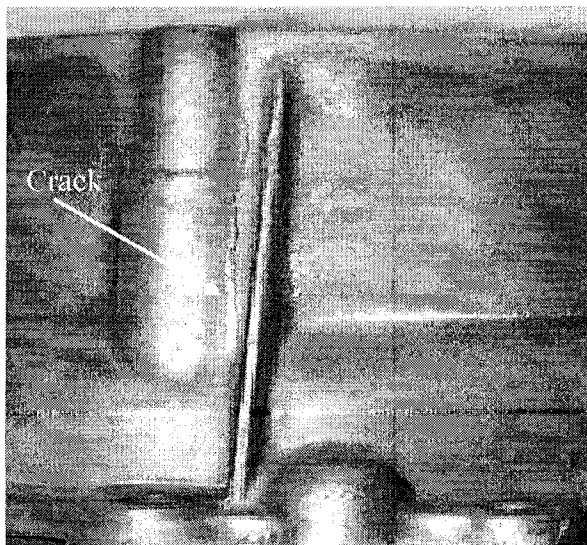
Casting defect (cracking) present in a die cast transfer case [31].
